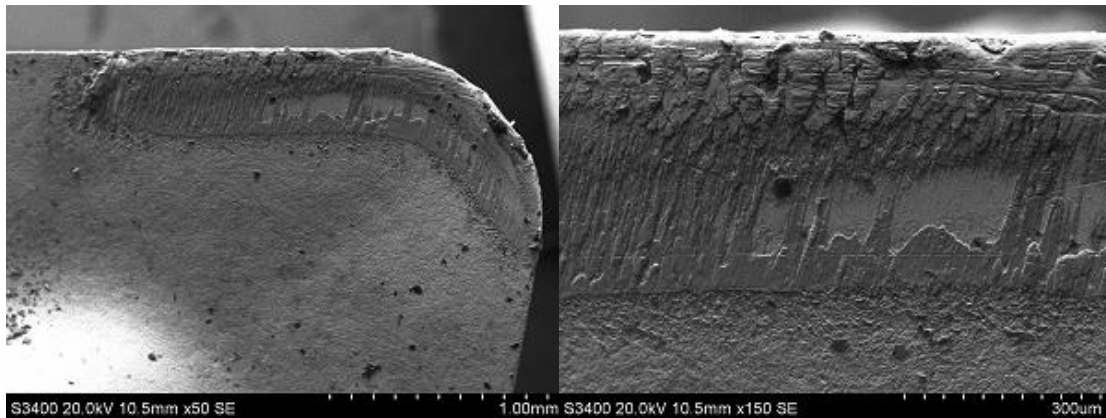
SEM images of cutting tool when cutting speed is 60m/min and feed rate is 0.30 mm/rev (left) and amplified part (right) after machining 30 cm<sup>3</sup>
